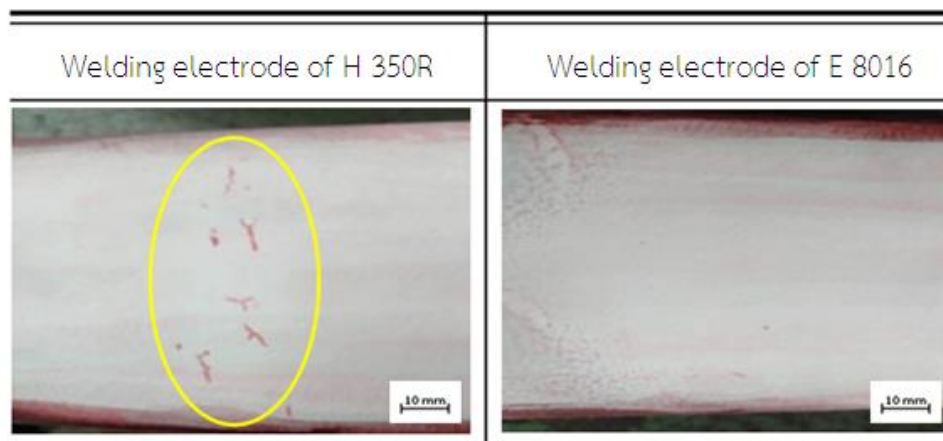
Examine the top welding surface with penetrant testing (PT)
